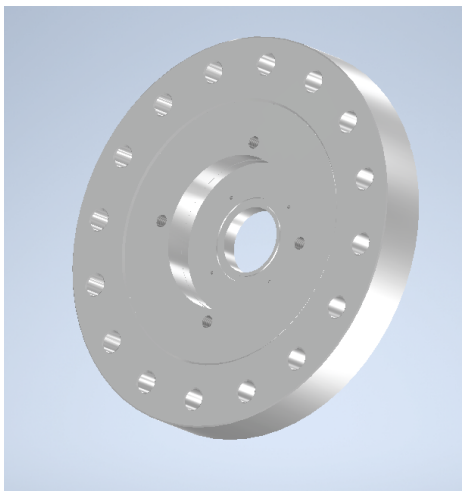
Design of the back flange of the quadrupole that is to be welded to the vacuum chamber.
